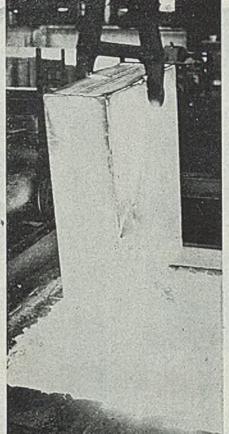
Stainless sheets are given deposit of electrolytic iron in this plating bath. Under Armstrong process, this coating prevents formation of iron oxide on sheets and makes bonding between tainless and backing plates easier
